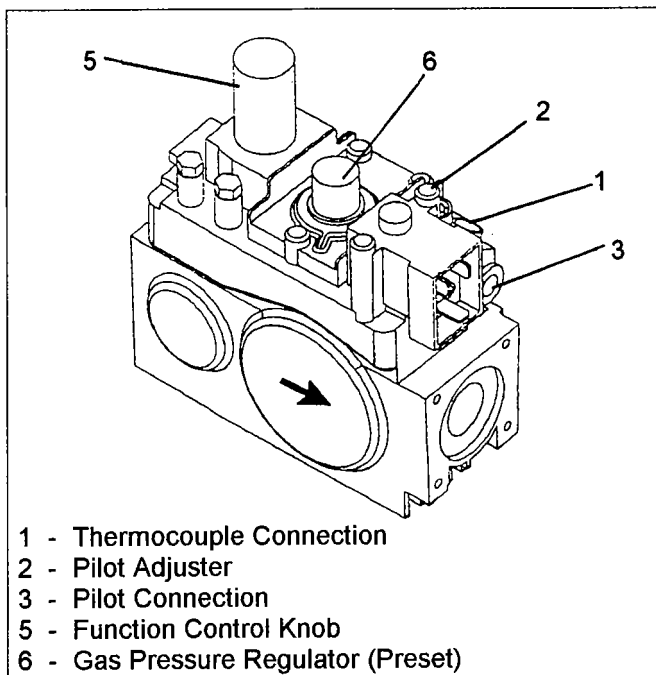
Valve Type 2A - SIT Thermo-Electric Valve
